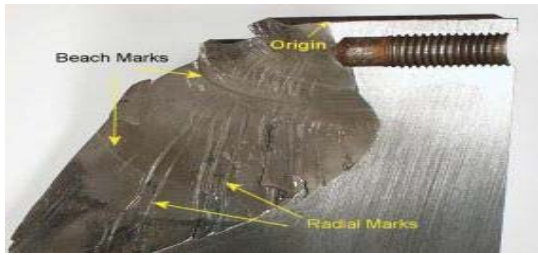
Beach and radial marks visible on torsional fatigue fracture of a 6 in. Diameter shaft.. [2]
